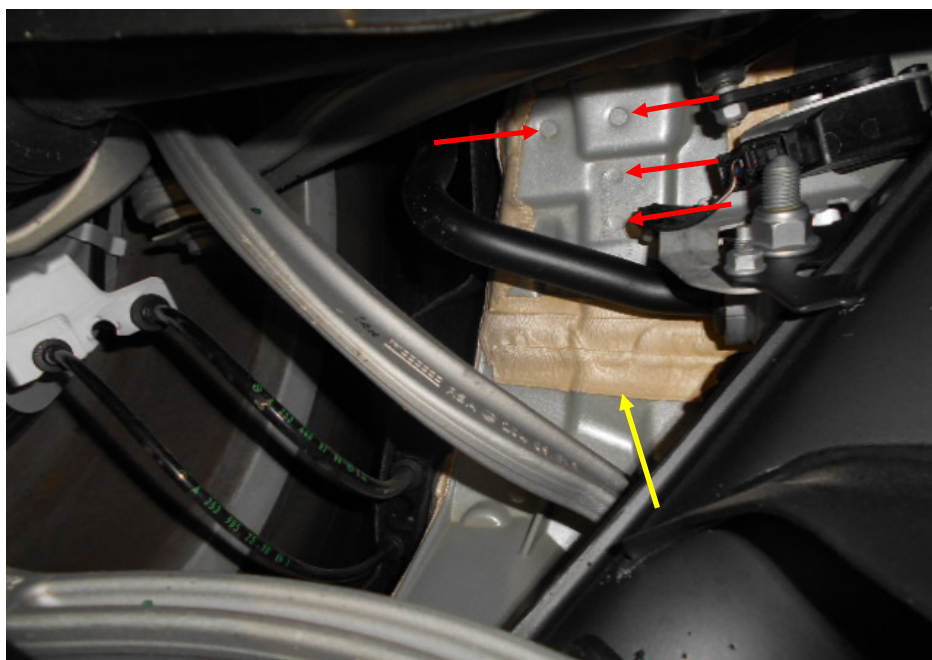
shows the structural body/floor panel at the rear left wheel house panel of the Motor Car. I did not find any weld marks, other than original spot weld marks (red arrow), on the rear left wheel house panel of the Motor Car. The original factory sealant (yellow arrow) at the joints along the body panels were also untouched, indicating no work was done on the rear left wheel house panel of the Motor Car and that the structural body was originally fitted.
